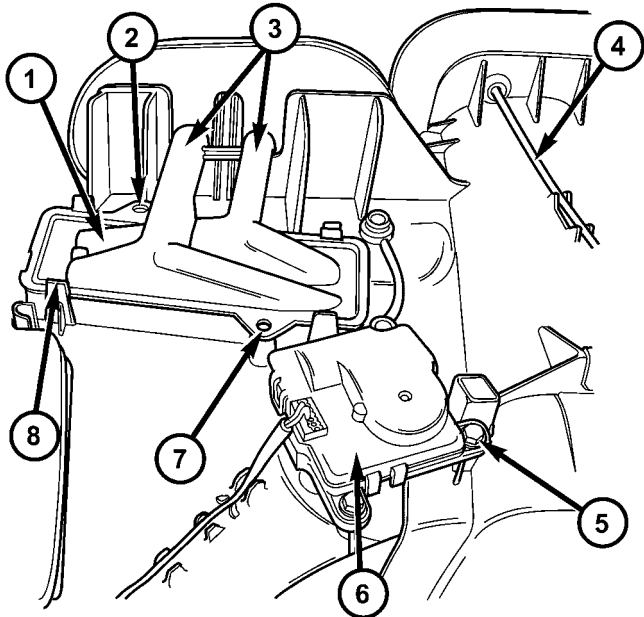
HEATER CORE REMOVAL/INSTALLATION
